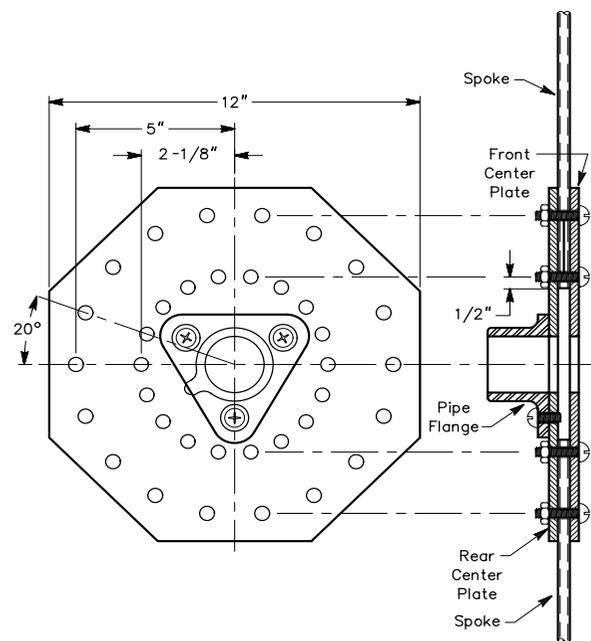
Center plate details. Two center plates are bolted together to hold the spokes in place.
